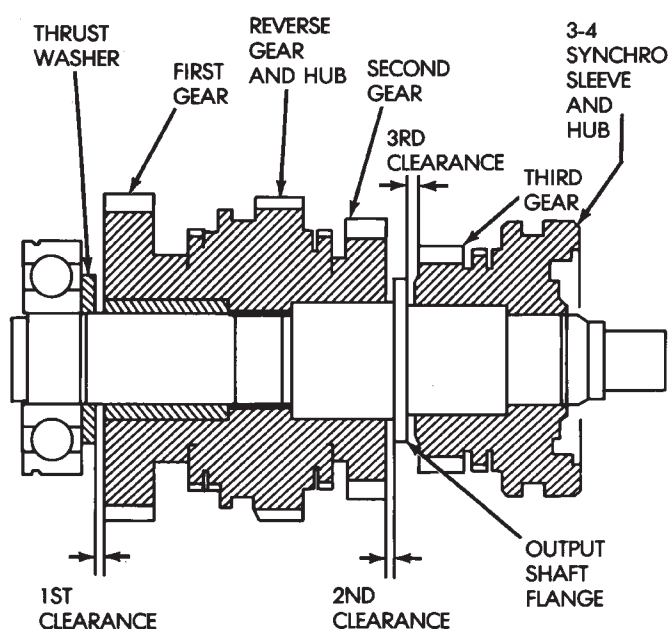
Checking Output Shaft Gear Thrust Clearance
